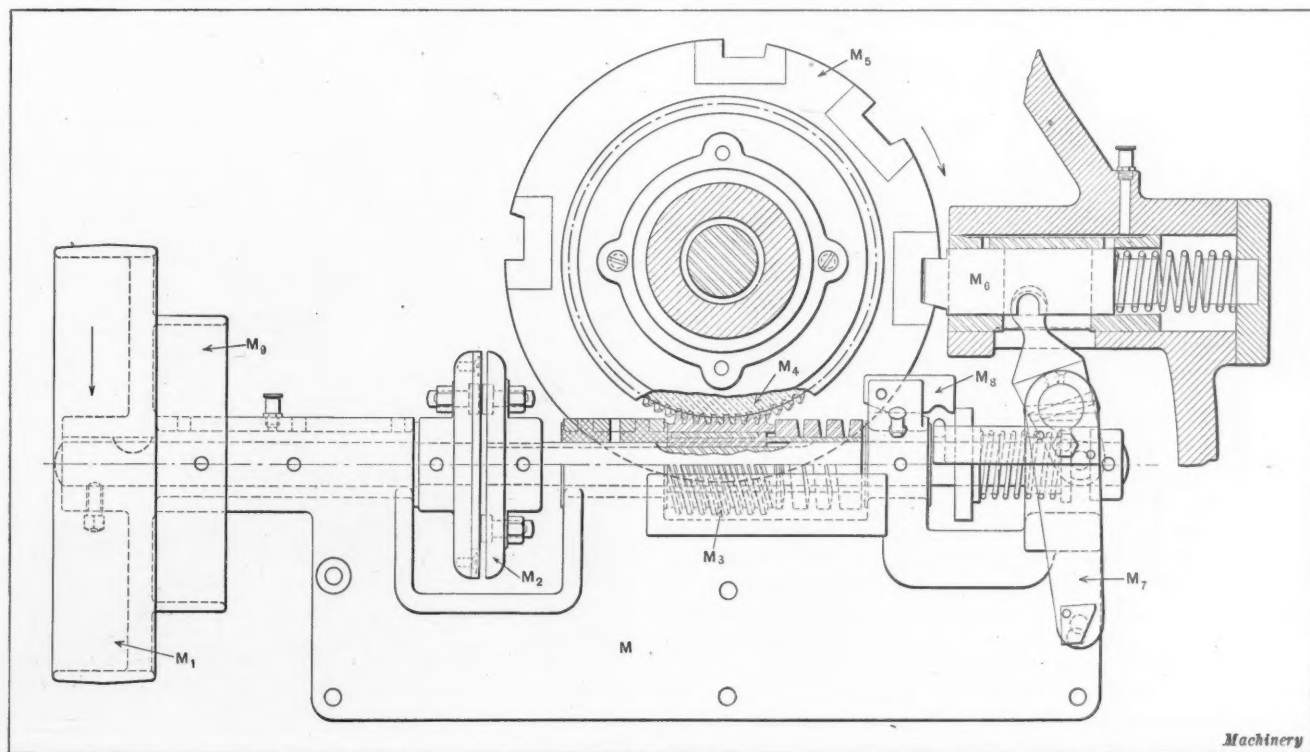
Sectional View, showing Revolving Mechanism for indexing Turret on Gridley Single-spindle Automatic Turret Lathe
